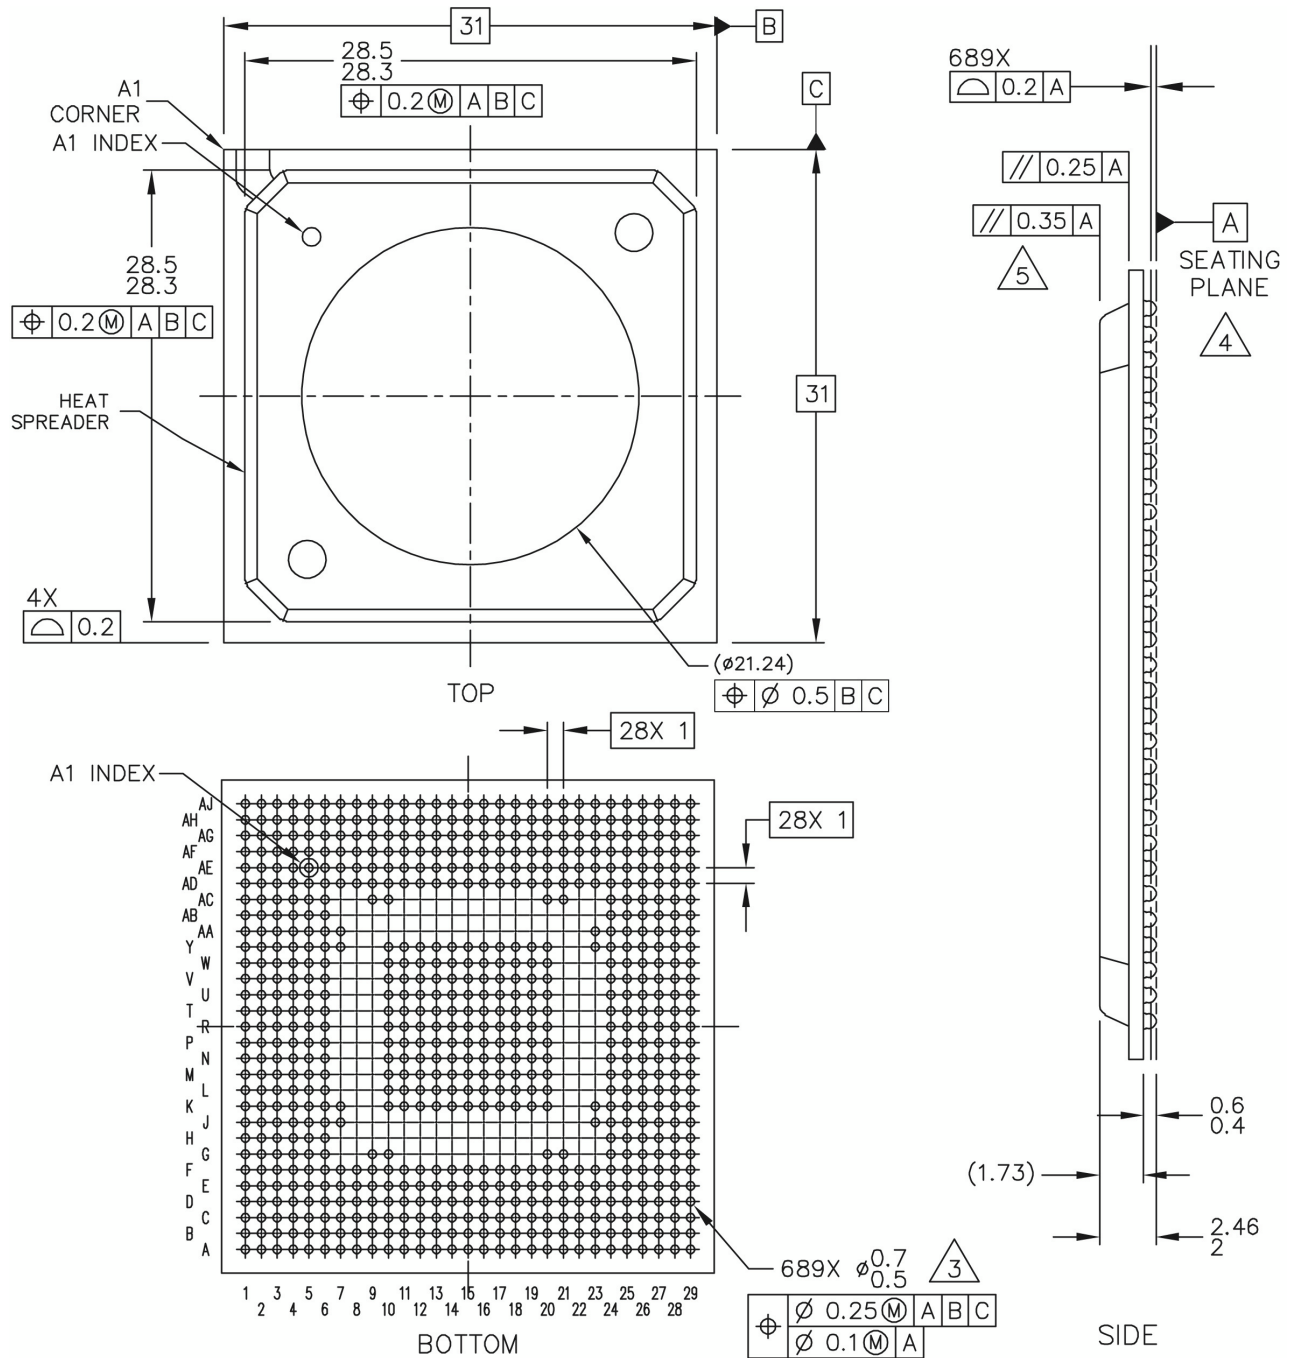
Mechanical Dimensions and Bottom Surface Nomenclature of the TEPBGA II
